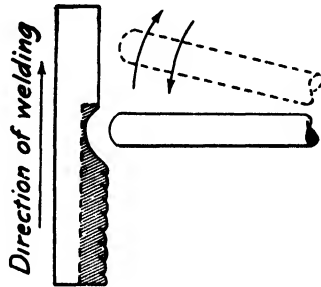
In making a lap weld in thin material (up to about $\frac{1}{4}$ in. thick), point the electrode more toward the flat piece to better control the heat and the placing of the weld metal.
